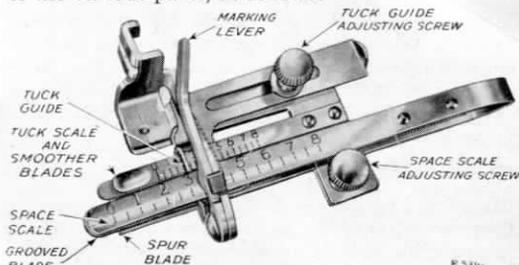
THE TUCKER AND ITS WORKING PARTS
